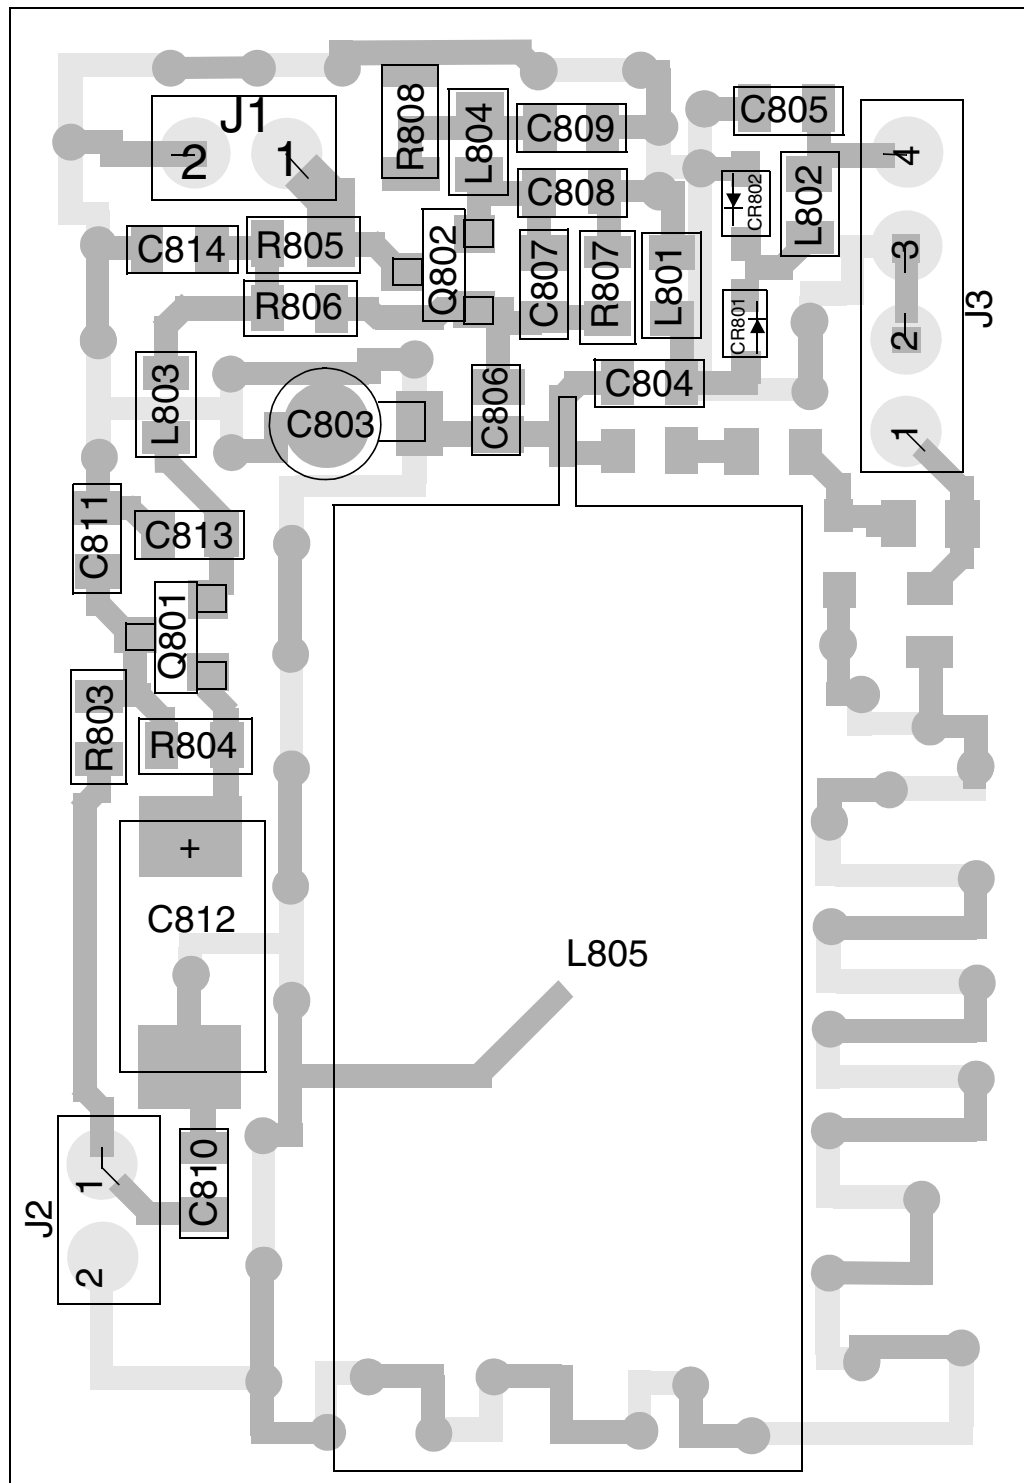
RECEIVER VCO COMPONENT LAYOUT
